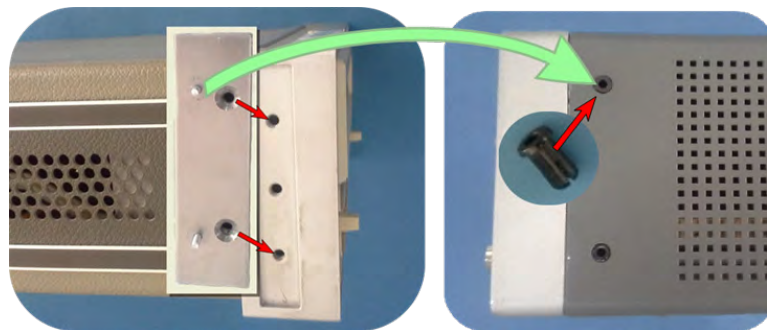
Front assembly plate installation Agilent unit (shown left), GSG unit
